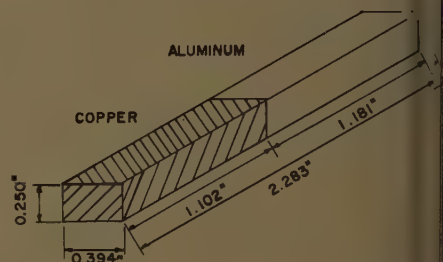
Cantilever-beam impact test specimen of flash-welded aluminum-copper joint
